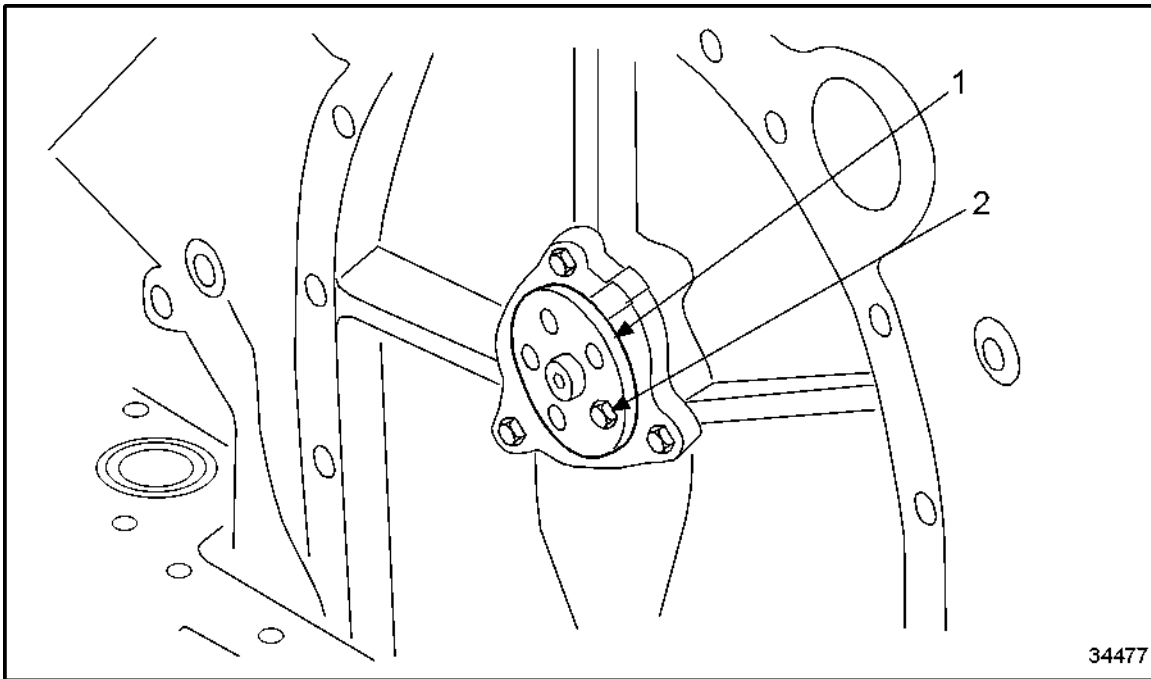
Installing Hex Bolts and Thrust Bearing Flange
